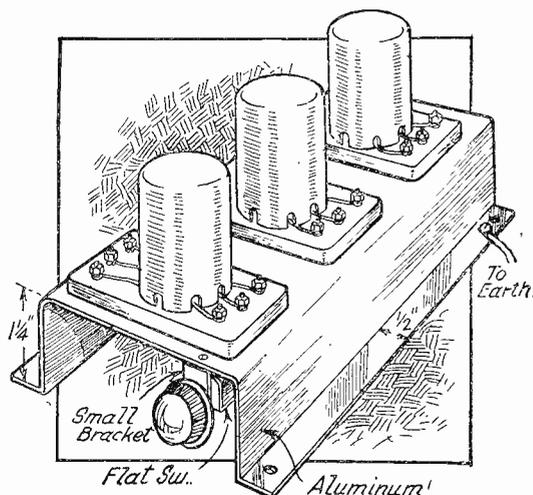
A neat way of building up a complete coil and switch assembly.
